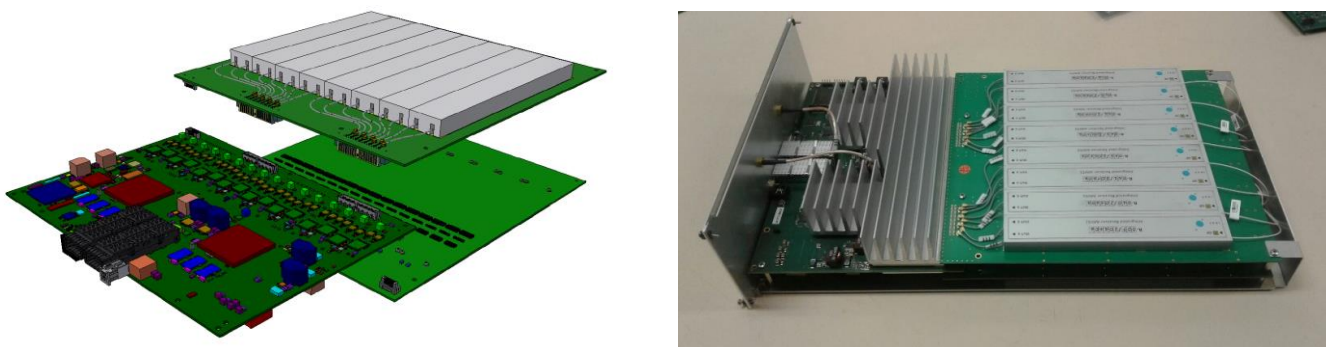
TPM assembly showing two Pre-ADU(s) and one ADU: the exploded view drawing obtained from 3D CAD (left) and a picture of the realized hardware (right).
